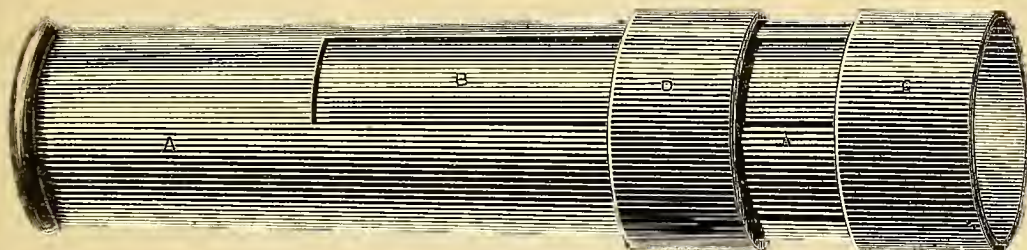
IMPROVED BRASS WINCH FITTING.
